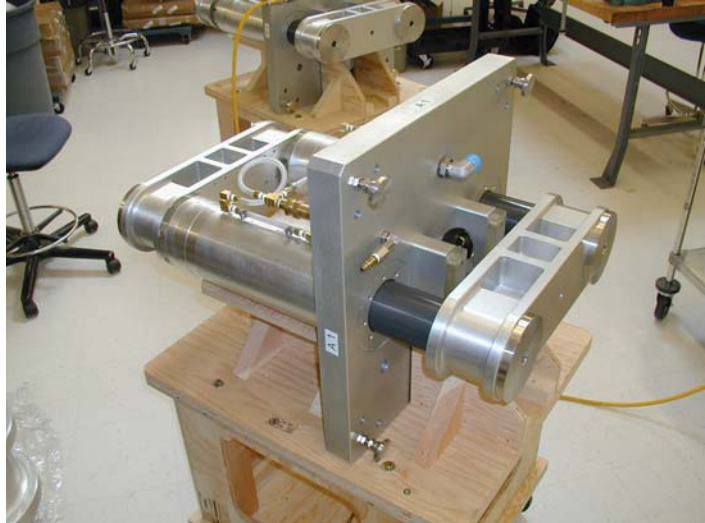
Partially assembled Type A device showing the carriage rails and lower crossmember. Bellows seals are installed later.
